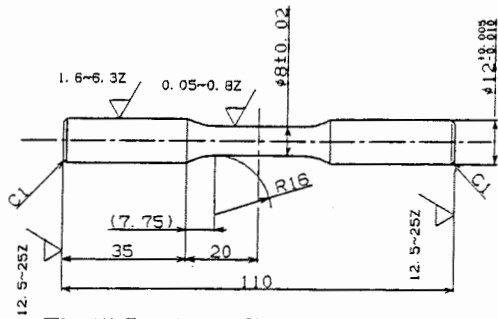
Specimen dimension for rotating bending corrosion fatigue test
